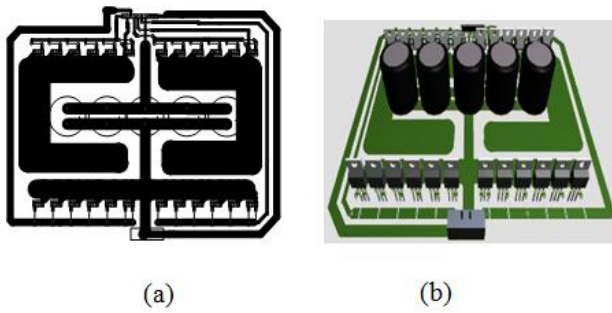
Bottom layer View of the CSN Printed Circuit Board (PCB) Design (a) and 3-D Top Layer View of the CSN (PCB Component Layout)
